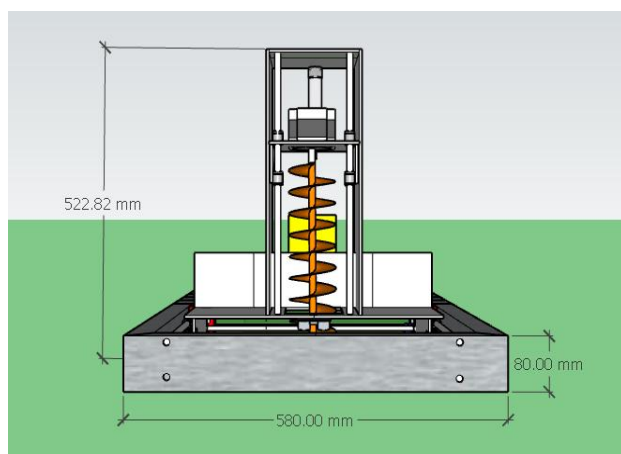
Propose Technical Drawing for the Machine's Design. (Front View)
